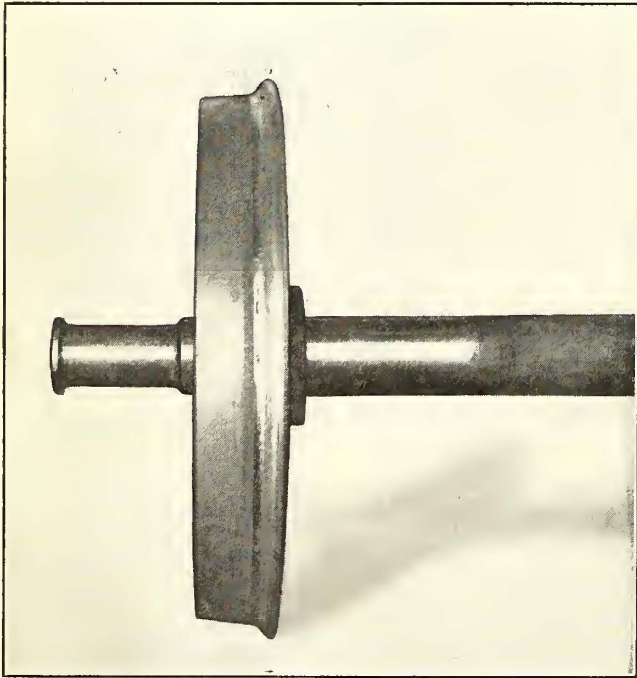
shows one wheel of a pair removed from a 50-ton car on account of a sharp flange. To give this
